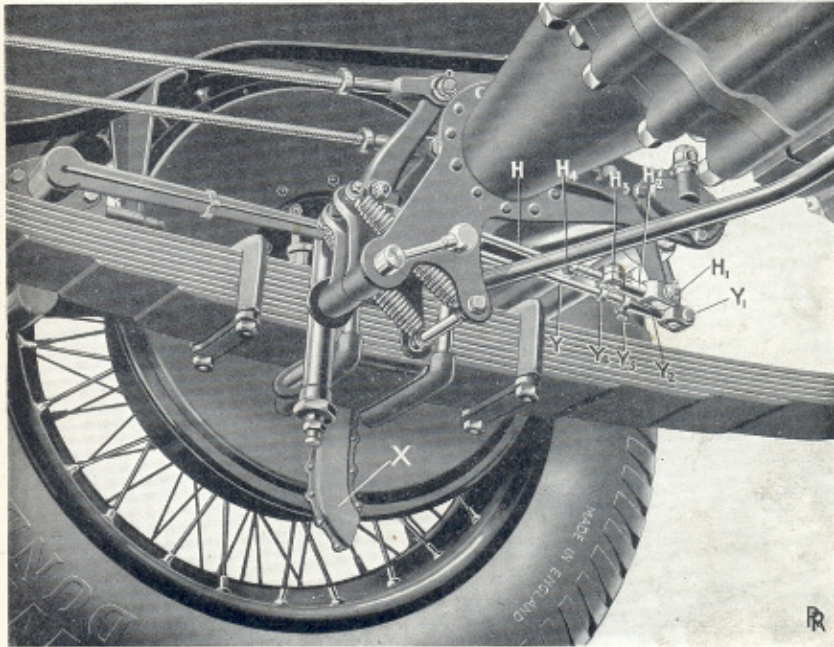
REAR WHEEL BRAKE ADJUSTMENT.
